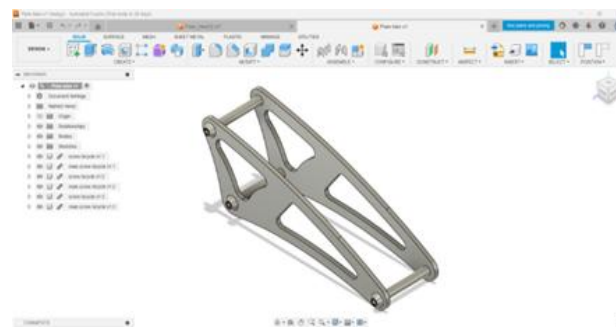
The assembled parametric CAD model of the MTB rocker arm in Autodesk Fusion 360
